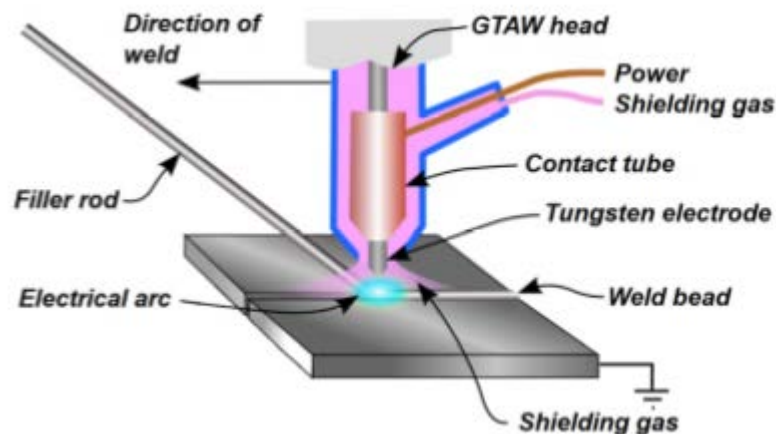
GTAW process welding schematic, adapted Rodrigues Parda (2016).
